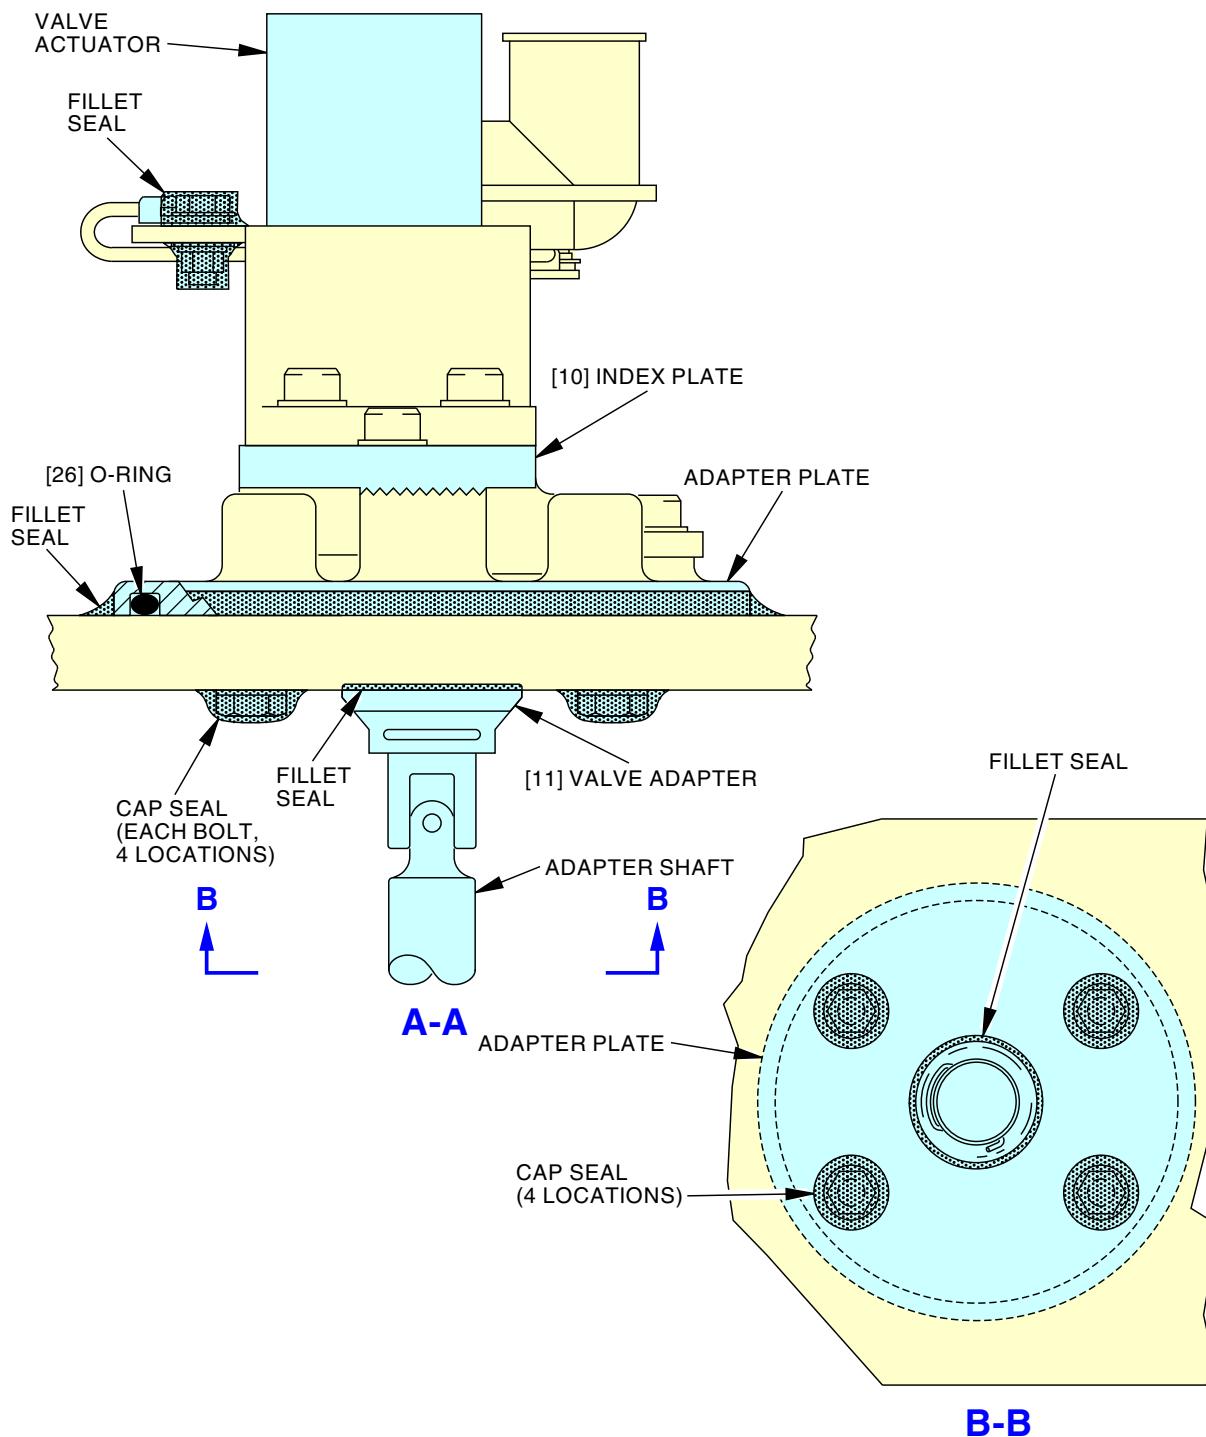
/28-22-11-990-805 (Sheet 3 of 4)
